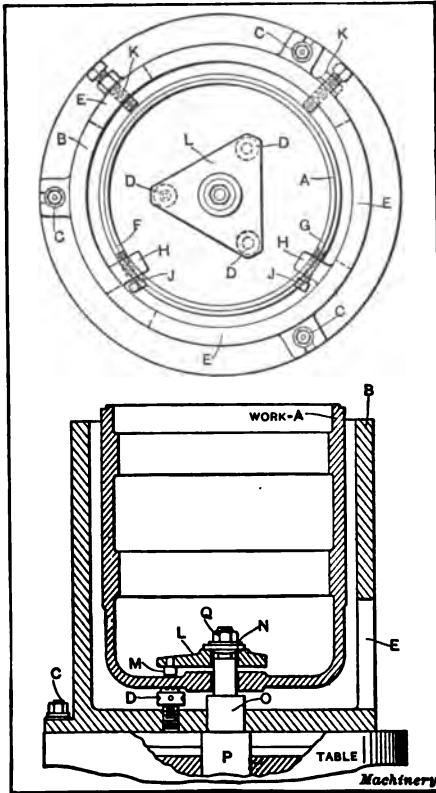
Pot Casting Fixture for Holding Steel Castings on Vertical Turret Lathe
